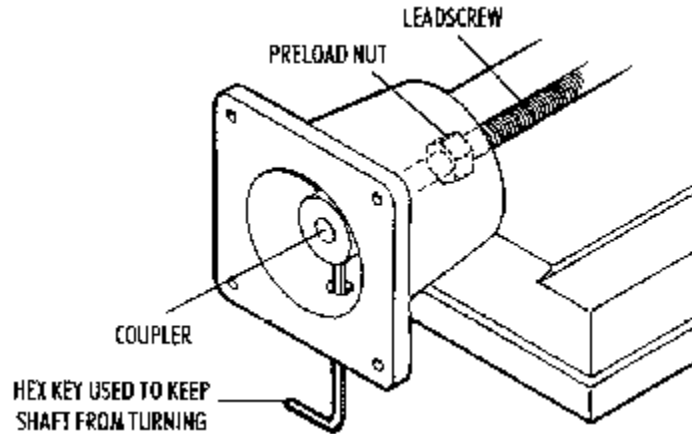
Keeping the leadscrew from turning while tightening 5-40 screw and the preload nut. NOTE: In the drawing above, the mill base is used as an example, but the same technique is used on the lathe. Note also that the access hole is now located on the side of the mount rather than the bottom as is shown here.
